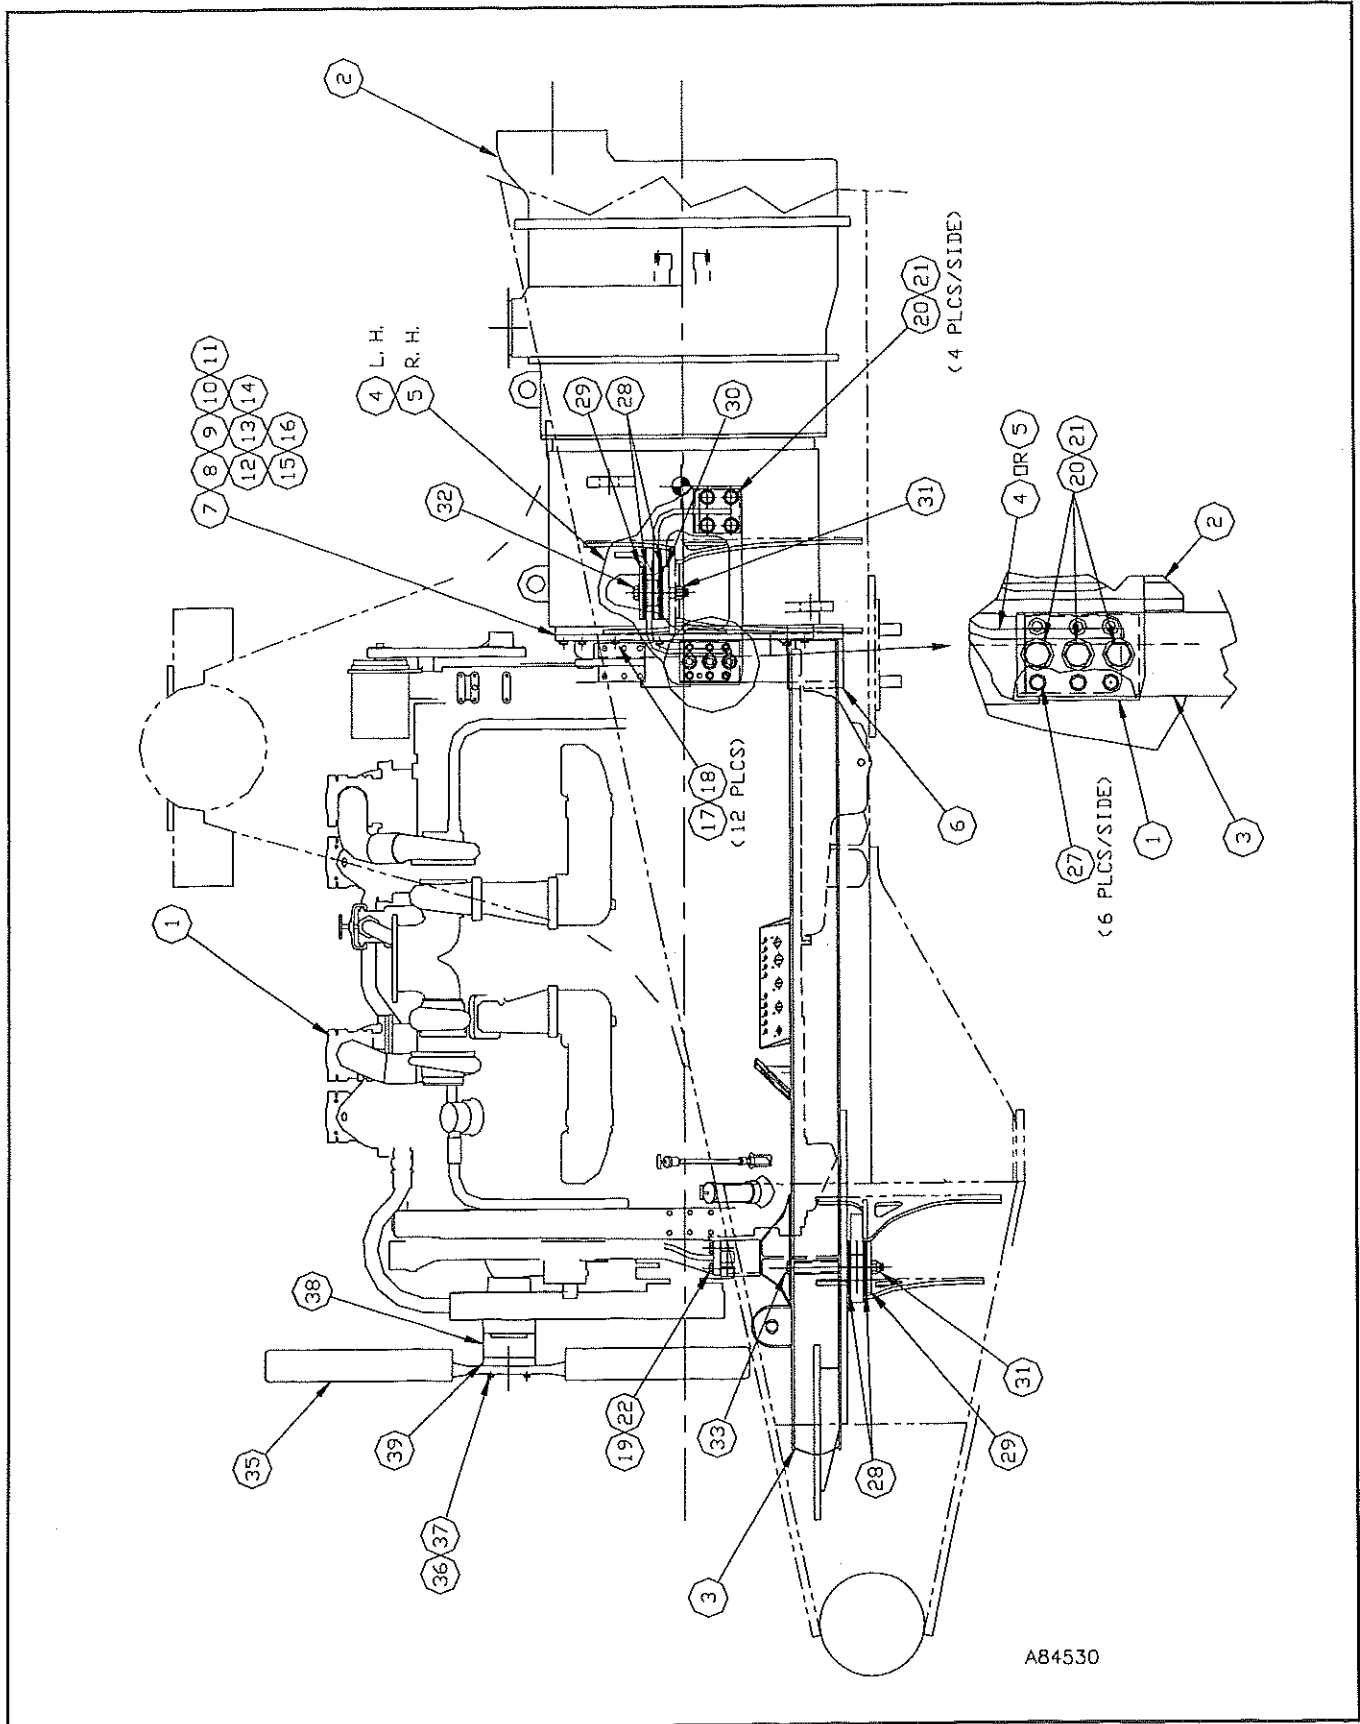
TYPICAL ENGINE MODULE ASSEMBLY
